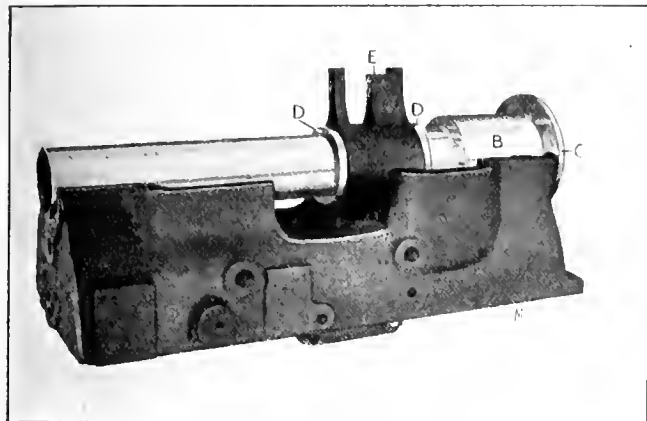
Method of Gaging Clearances for Spindle Gears in a Lathe Headstock
